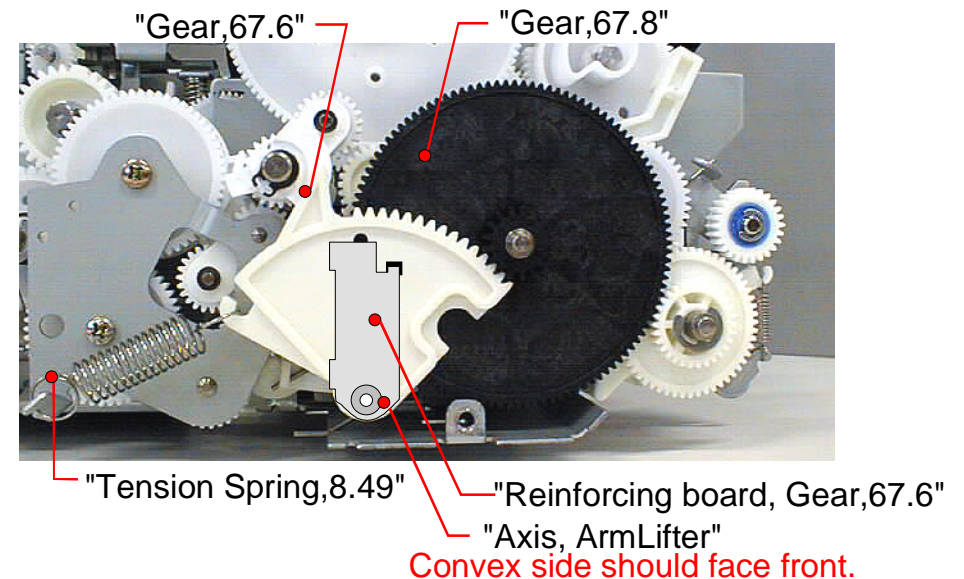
Installing the rest parts of "Frame Assembly, Middle, Right"(3)
